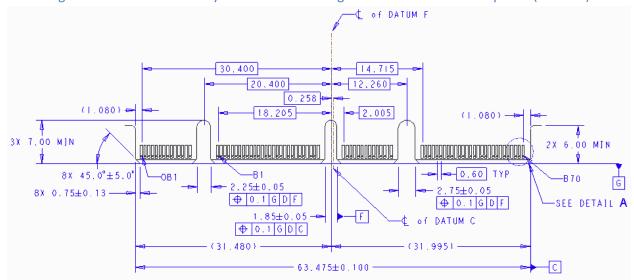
Small Size Primary Connector Gold Finger Dimensions – x16 – Top Side ("B" Pins)
